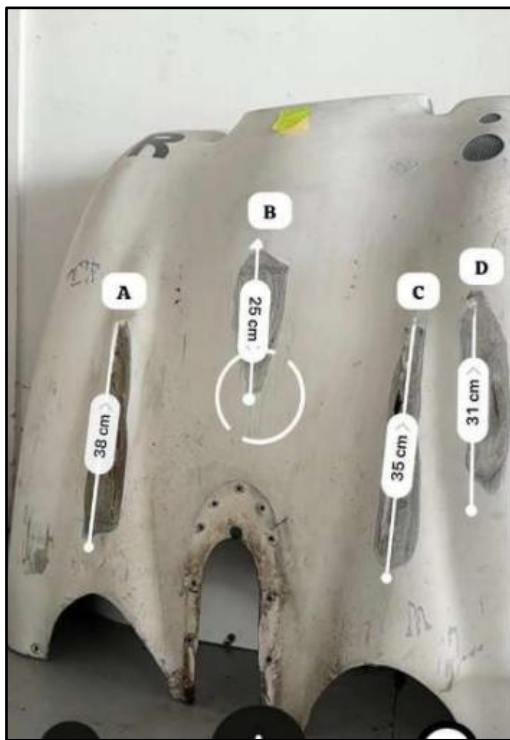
The lower engine cowling is heavily scratched in four places, and the length of the scratches is shown in the picture below. Scratch A and B were severely damaged, with holes appearing as a result of the propeller strike.
